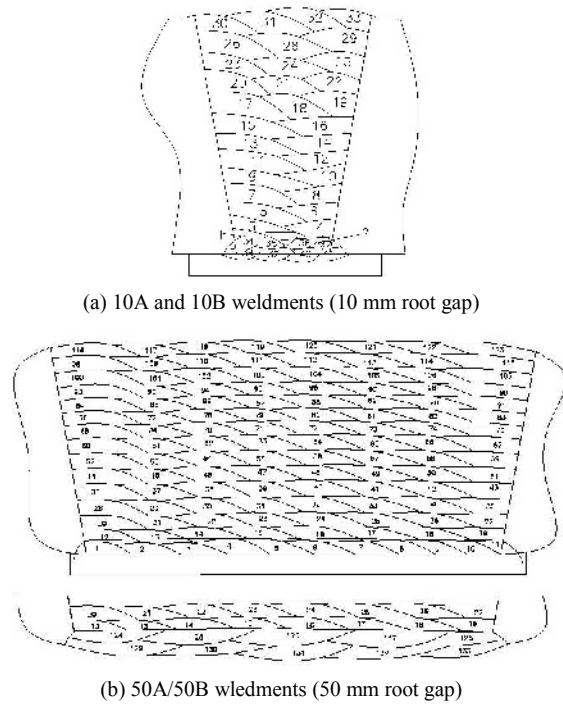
Profiles of the welding layers and pass number for 10A/10B and 50A/50B weldments.
